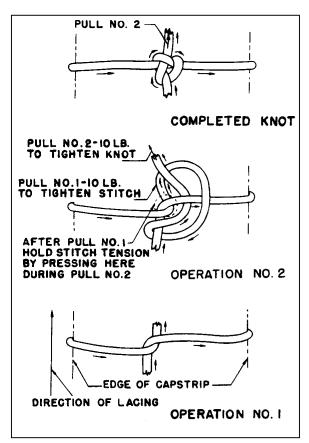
Standard external modified seine knot used for single and double rib lacing.
